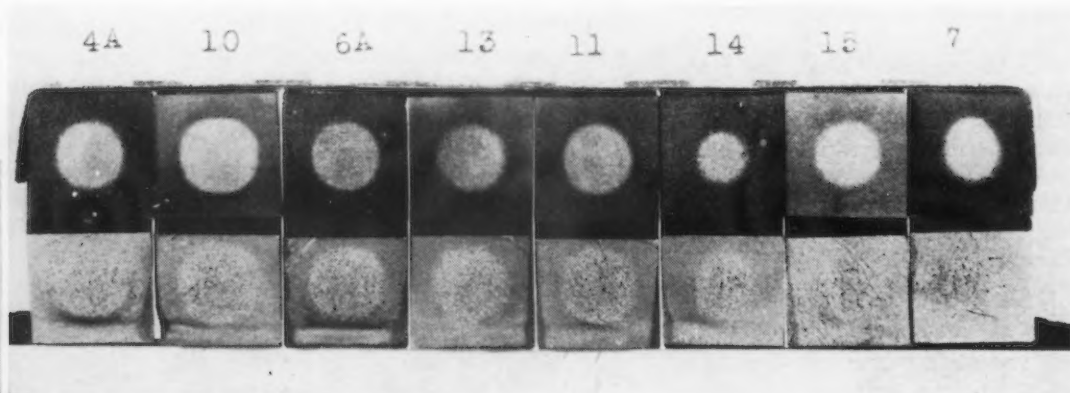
Cross-sections of a set of carbon tool steel test pieces which were softened, but not cracked, by improper grinding.
